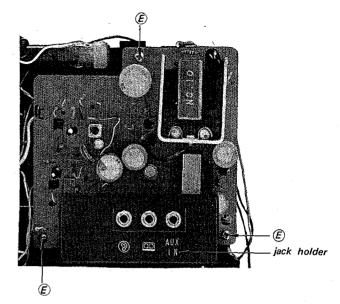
IF-AF circuit board removal, steps 2 and 3
